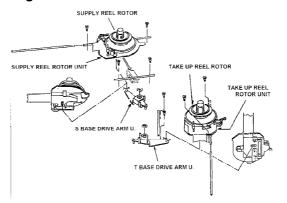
Installation of S & T Reel Rotor Unit
